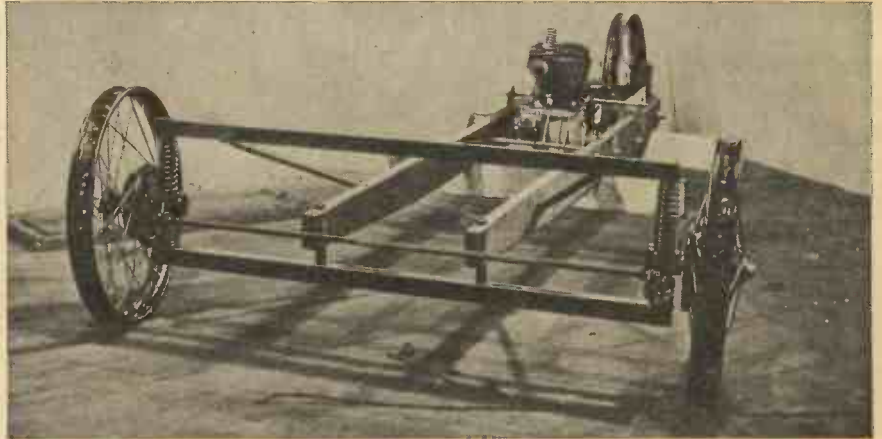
View with engine, gearbox, and rear wheel assembled.
